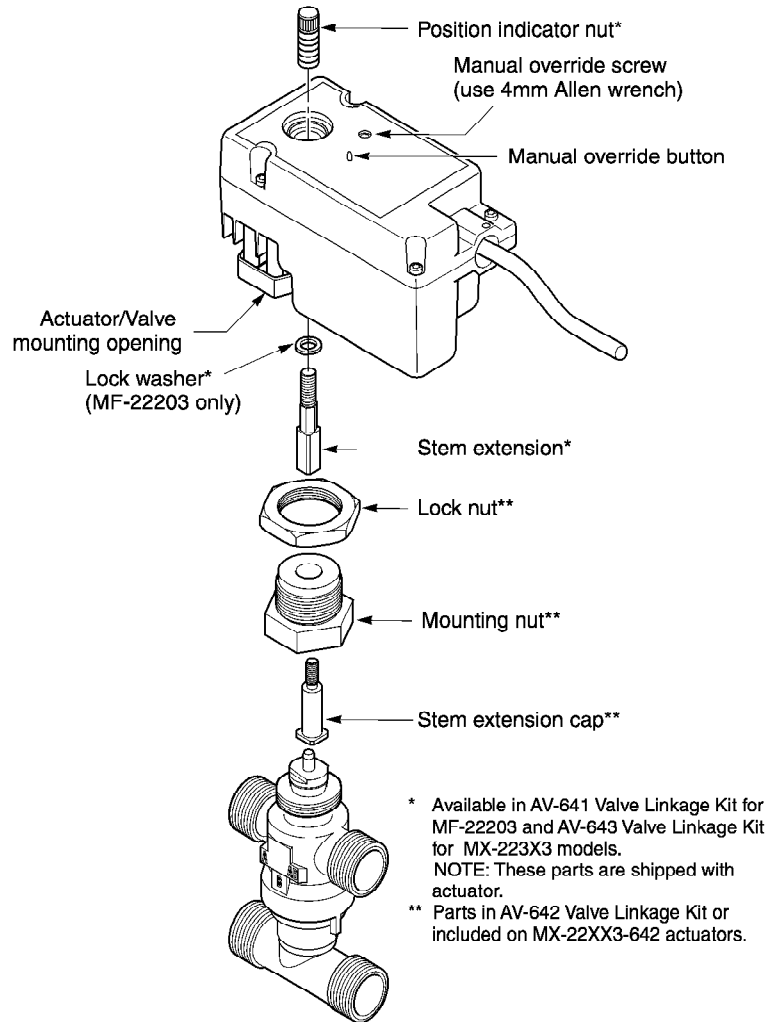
MF-22XX3 Actuator with AV-642 Valve Linkage.
